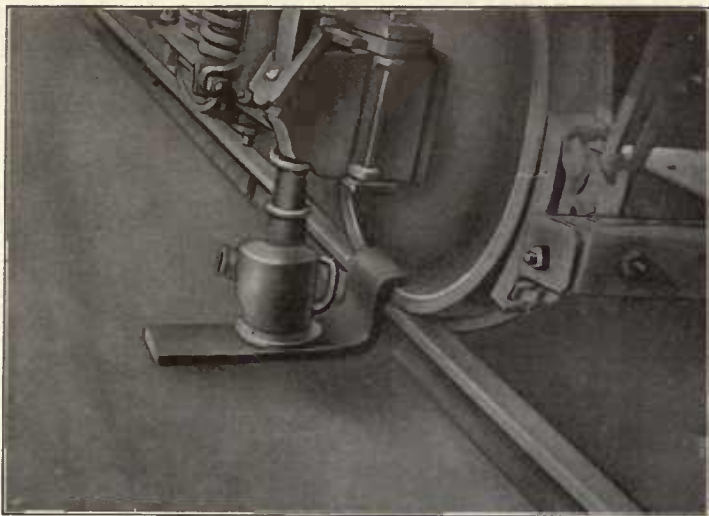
Jacking Up Journal Box Preparatory to Removing Brass.
